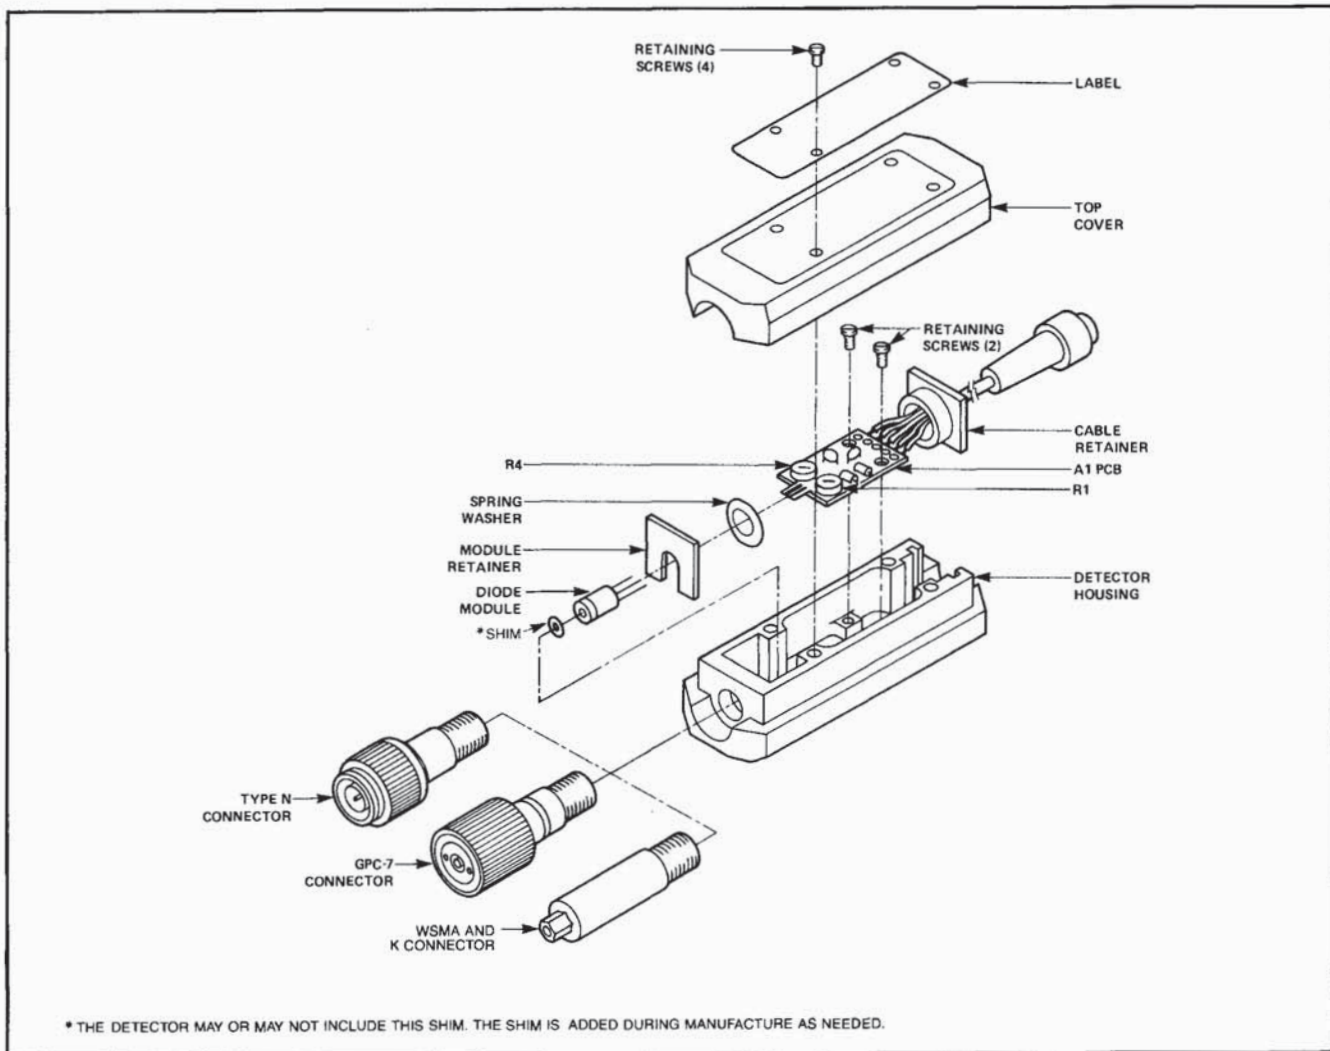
Model 560-7 Series RF Detector, Exploded View
